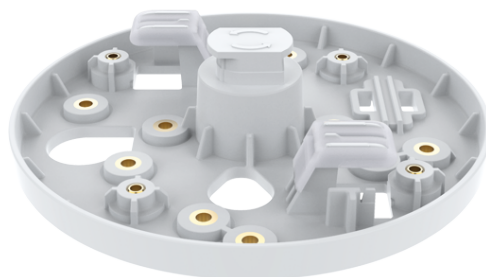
AXIS T91A33 Lighting Track Mount [3].
